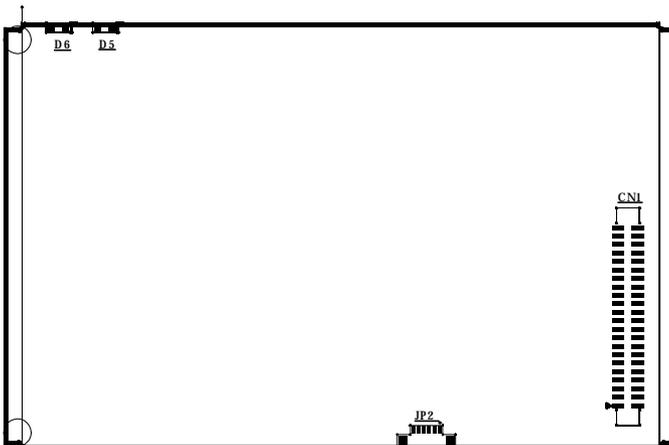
WebLink-2059 connector and jumper locations (Bottom View)
